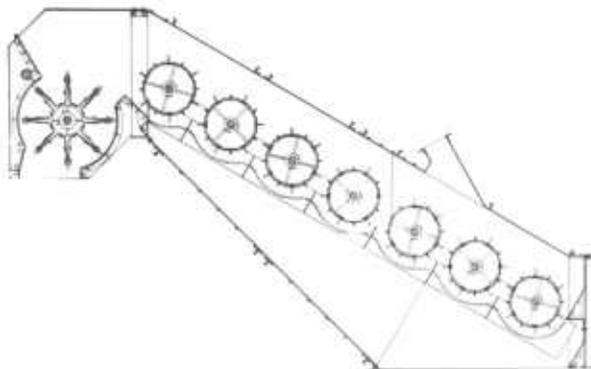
Seven-cylinder inclined cleaner.
